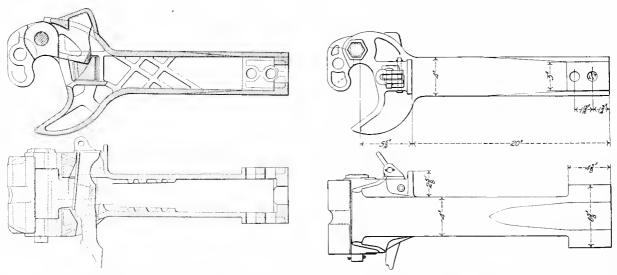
Pitt Coupler and Parts. McConway & Torley Co.
